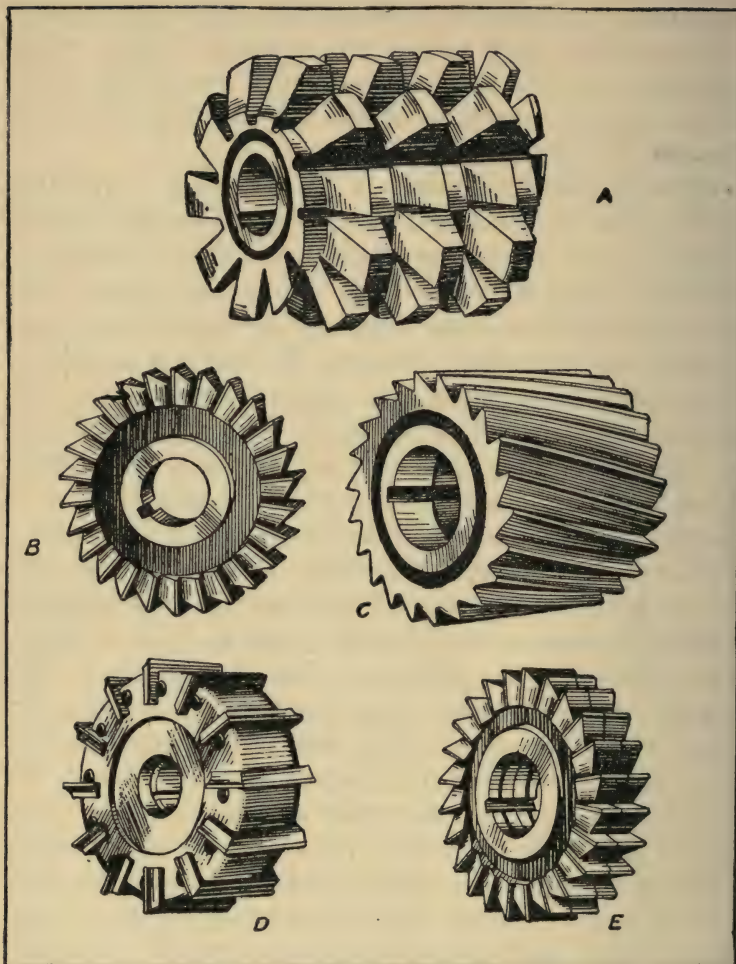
(A) WORM HOB CUTTER. (B) SIDE OR STRADDLE MILLING CUTTER. (C) PLAIN MILLING CUTTER. (D) INSERTED-BLADE CUTTER. (E) INTERLOCKING MILLER CUTTER
